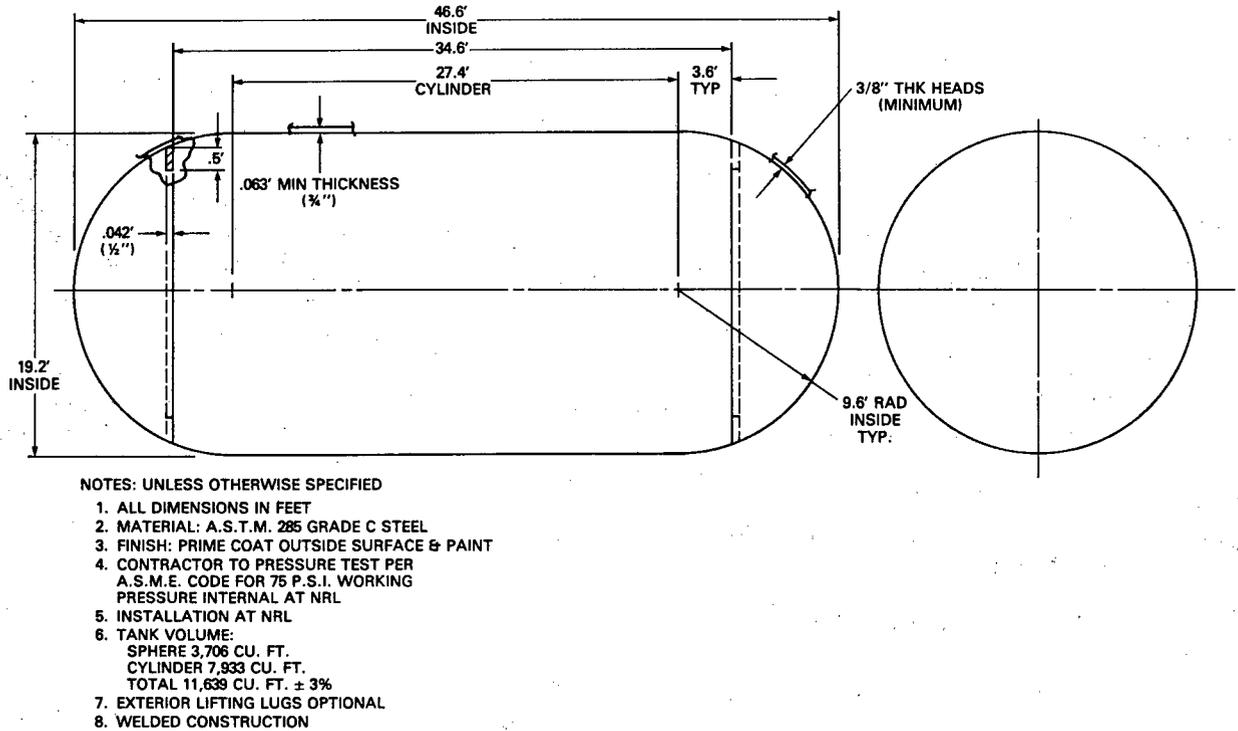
Blueprint drawing of 324 m<sup>3</sup> chamber
